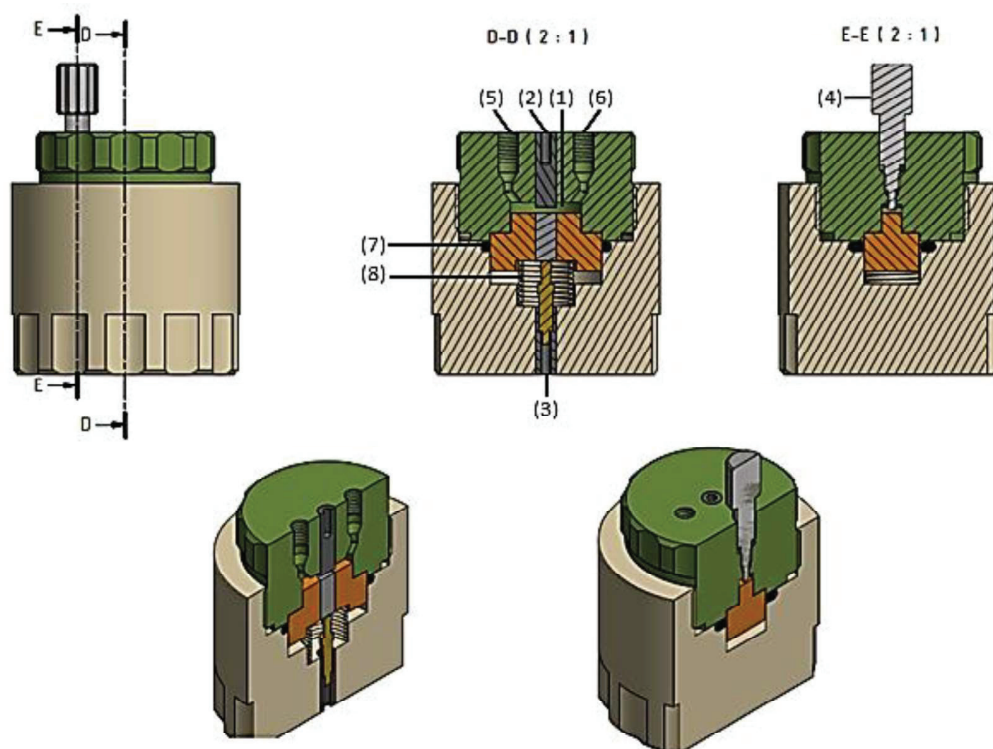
Schematic view of the DEMS cell: (1) Cavity for assembling the electrodes; (2-4) Stainless steel AISI 303 current connectors; (5-6) Gas inlet and outlet; (7) O-ring; and (8) Contraction spring.
